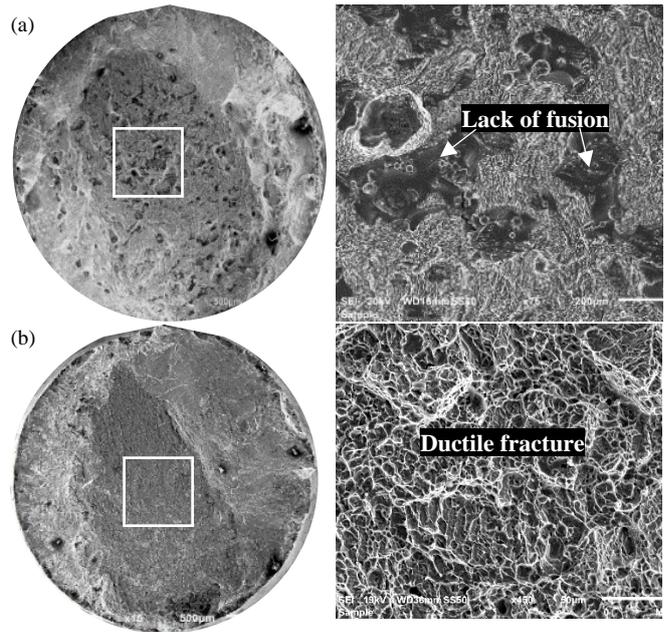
Fracture surfaces of: (a) Set 1 and (b) Set 2 specimens, showing lack of fusion defects and the fracture surface.
